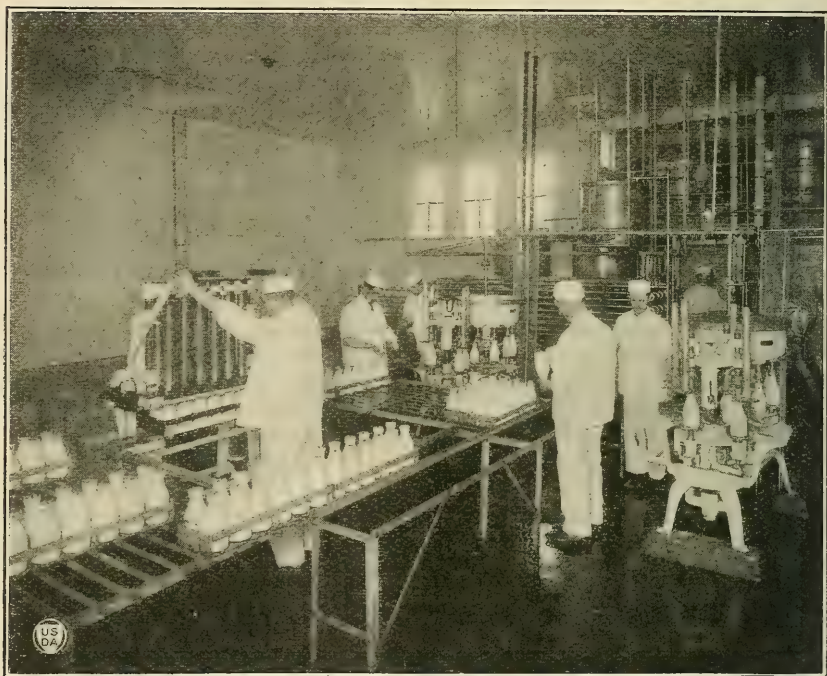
Filling and capping bottles by machinery. Note inspection of bottles both before and after filling.
